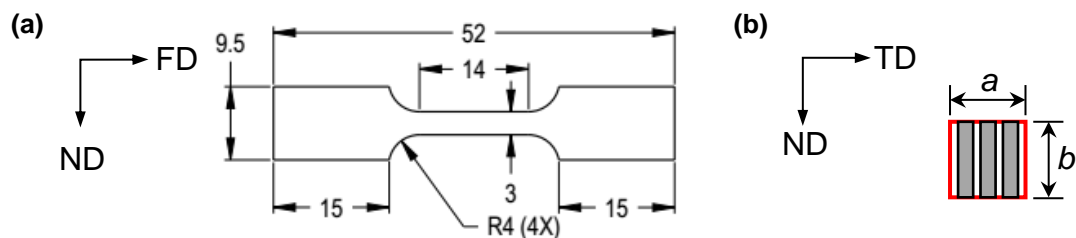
(a) Dimensions (in mm) of the flat tensile sample used in this study and (b) illustration of the three tensile samples cut across the cross-section (X-plane) of the billet.
